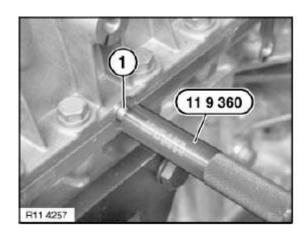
Driving Nozzles Into Crankcase Using Special Tool 11 9 360 Courtesy of BMW OF NORTH AMERICA, INC.
